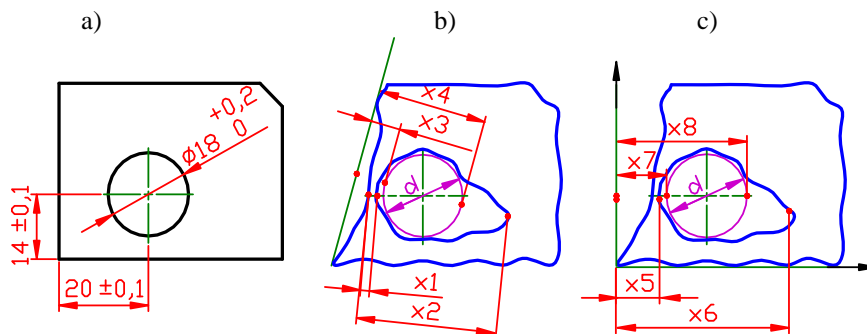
a) Specification with +/- tolerancing; b), c). The ambiguity of specification with +/- tolerancing for an actual workpiece
